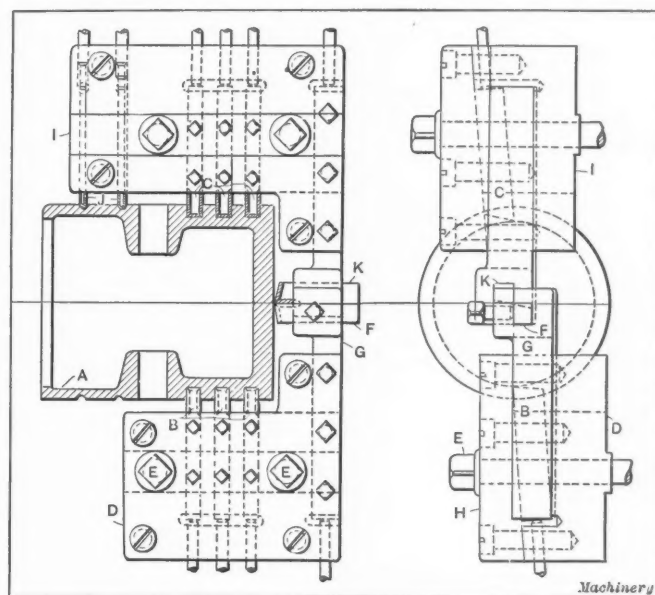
Special Cross-slide Fixtures for Rough- and Finish-grooving and Facing Pistons
